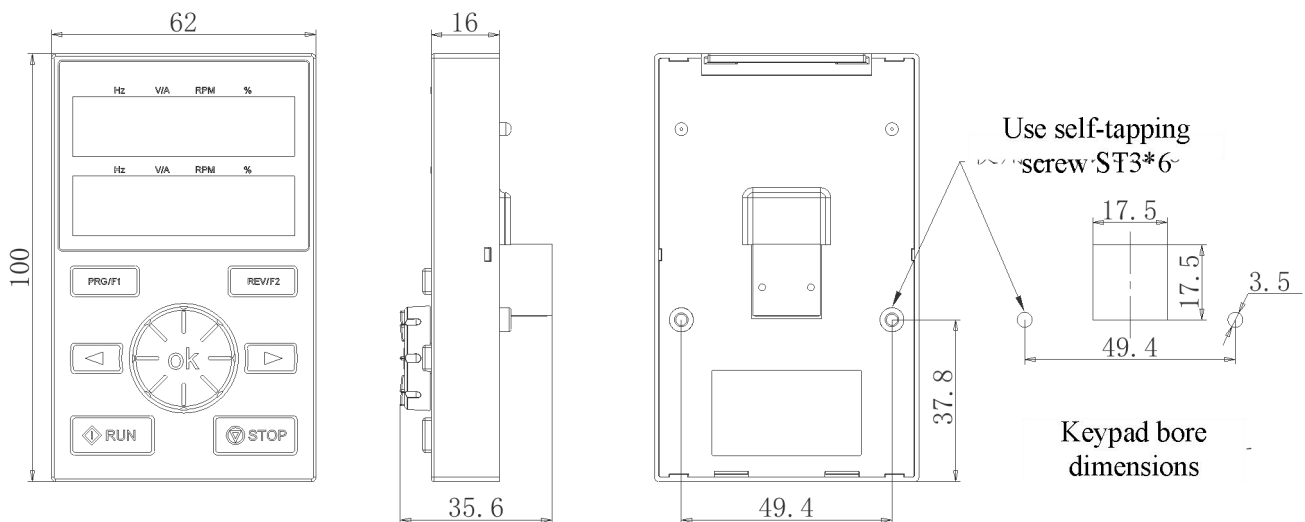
Outer Dimensions and Opening Dimensions of External Dual-line Keypad
